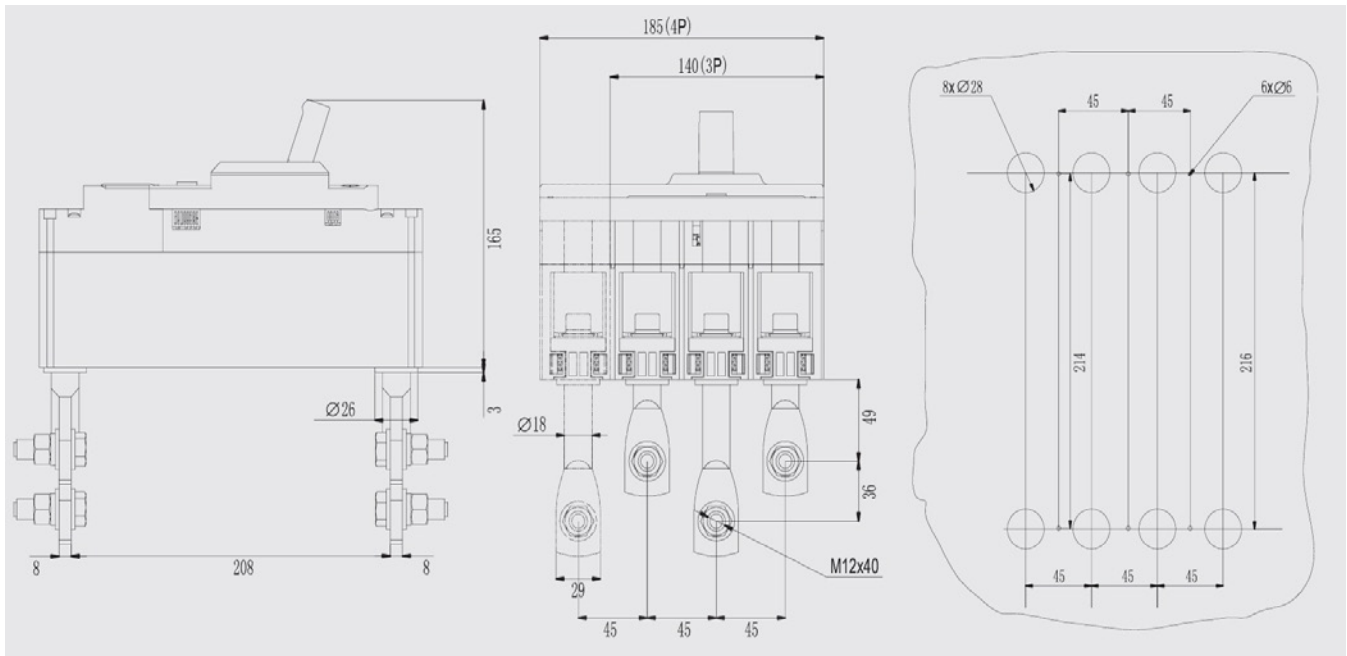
3P、4P Outline overall dimensions and installation dimensions of wiring products behind the board
